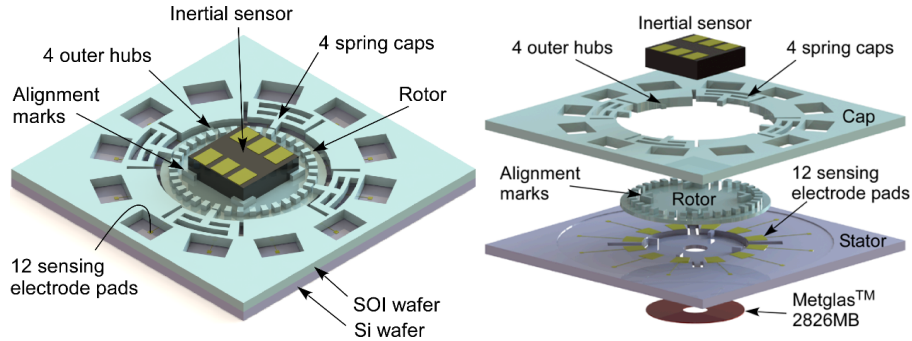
3D schematic and each layer of Gen.2.0 motor design. The design the rotor layer allows integration of alignment marks for the inertial sensors or fabricated together with the rotor layer.
